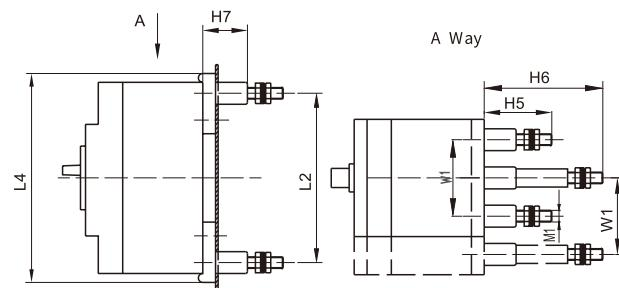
RDM1E-125, 250 Fixed type rear wiring
